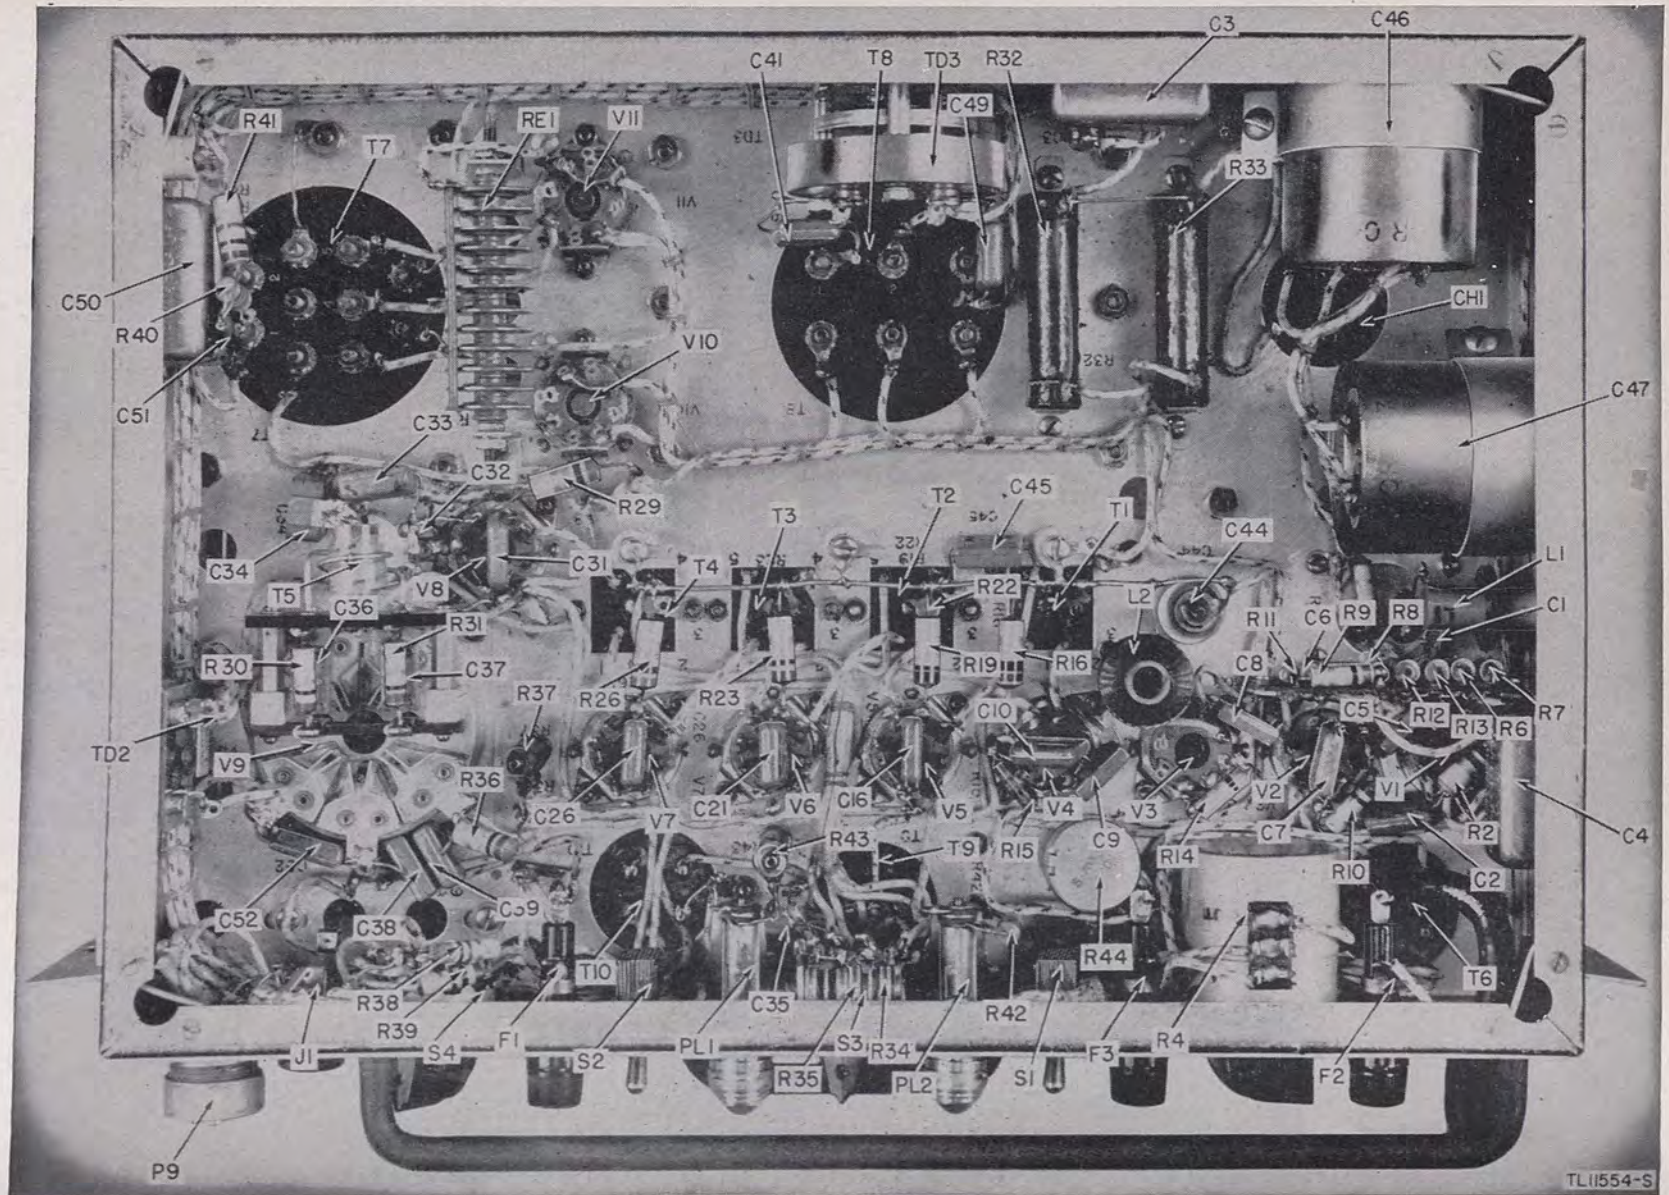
Radio Transmitter T-14(\*)—bottom view showing parts location.
